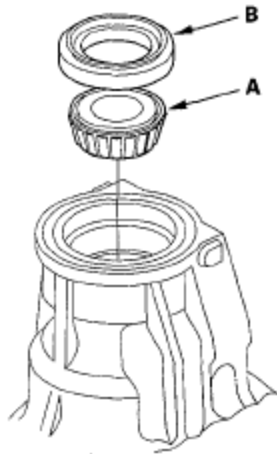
Identifying Tapered Roller Bearing And Oil Seal
